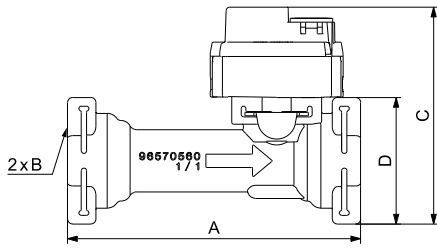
Dimensions, MFS 4-40 l/min, without adapter
